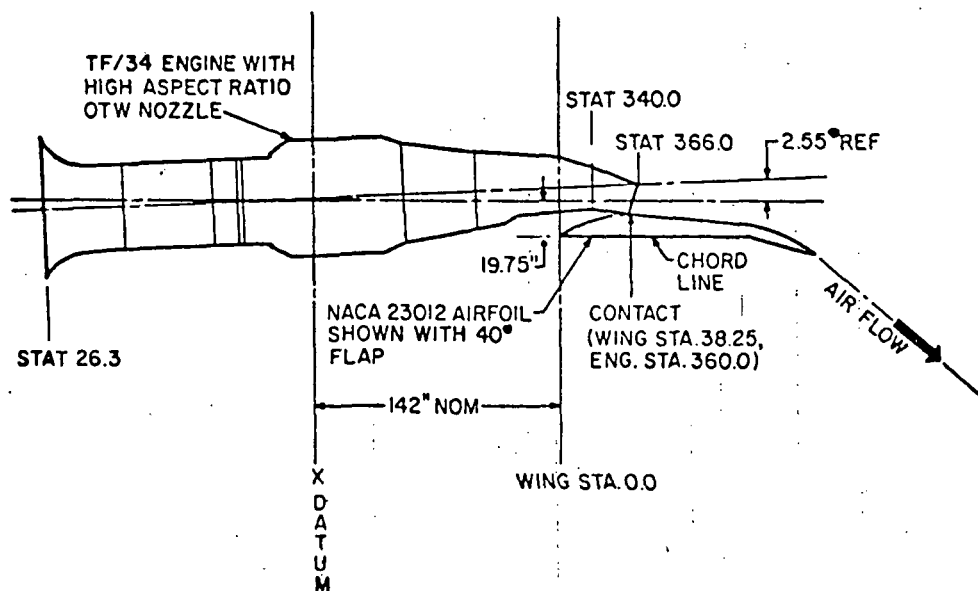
SECTIONAL VIEW OF TF-34 TEST BED.
